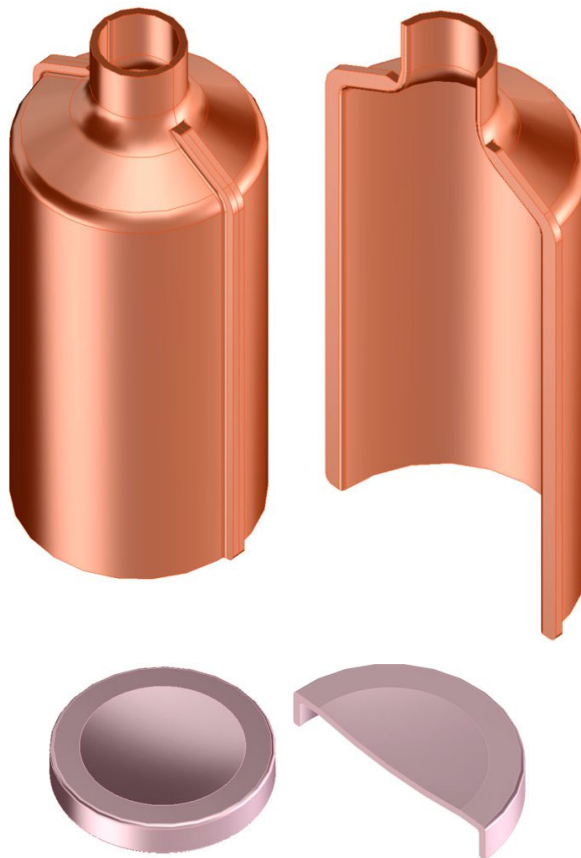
Hand drawn image of a hypothetical multi-part bottle (two parts for this example)
